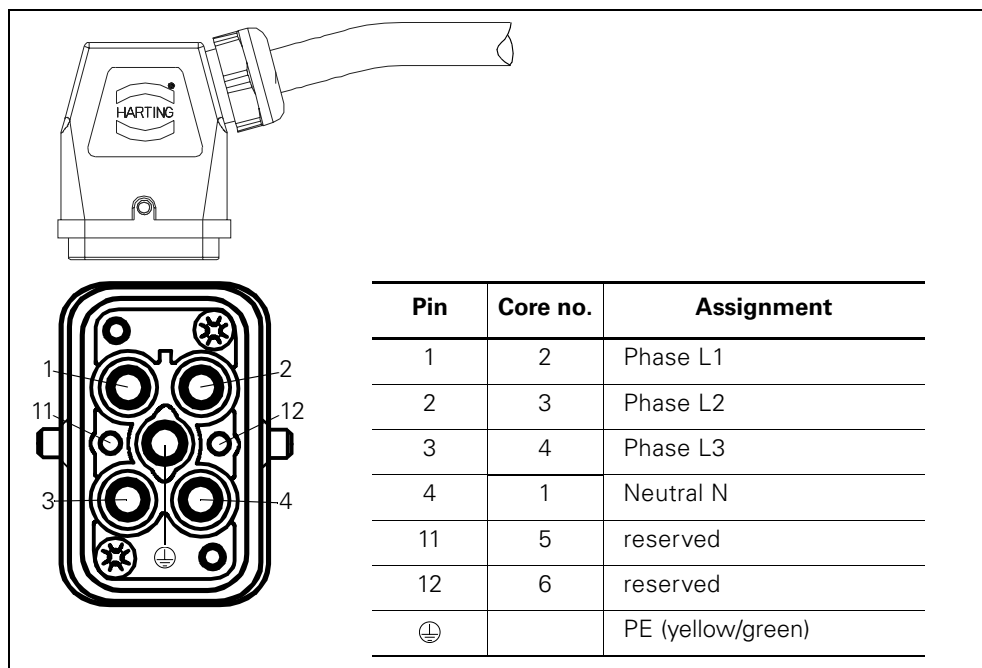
Power cables prefabricated at one end with Han Q4/2 pin
